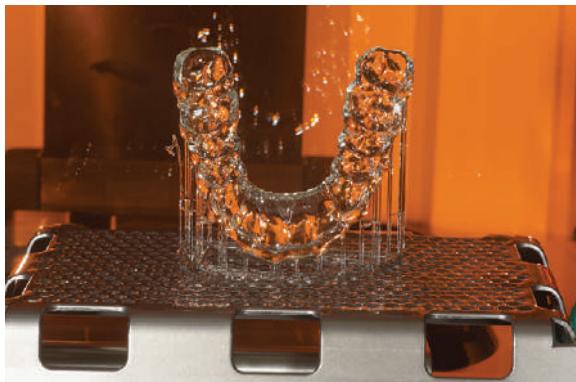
Completed printed device still on the build plate, removed from the enclosure.
